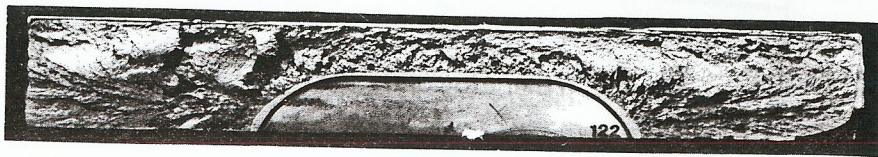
Fracture surface of a plate shaped specimen, test temperature 270 K, cleavage fracture.
